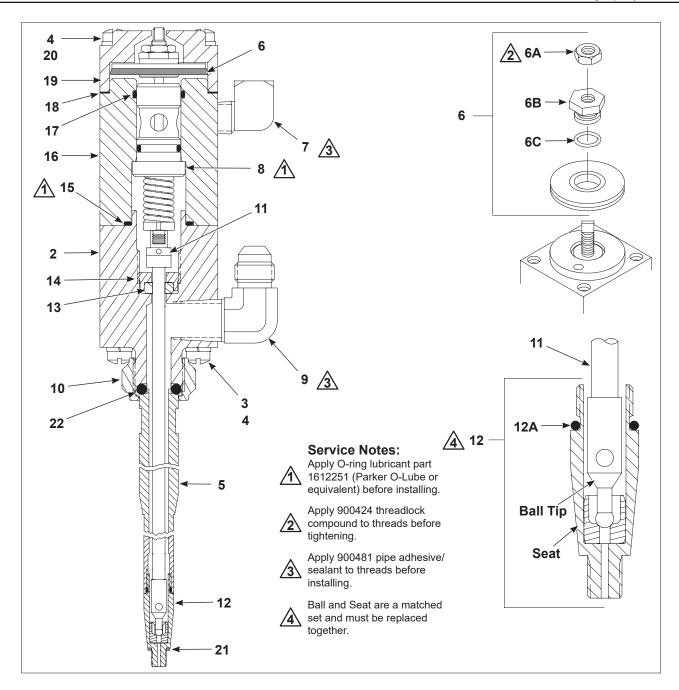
Repair (A7A Circulating Lancing Spray Gun)
